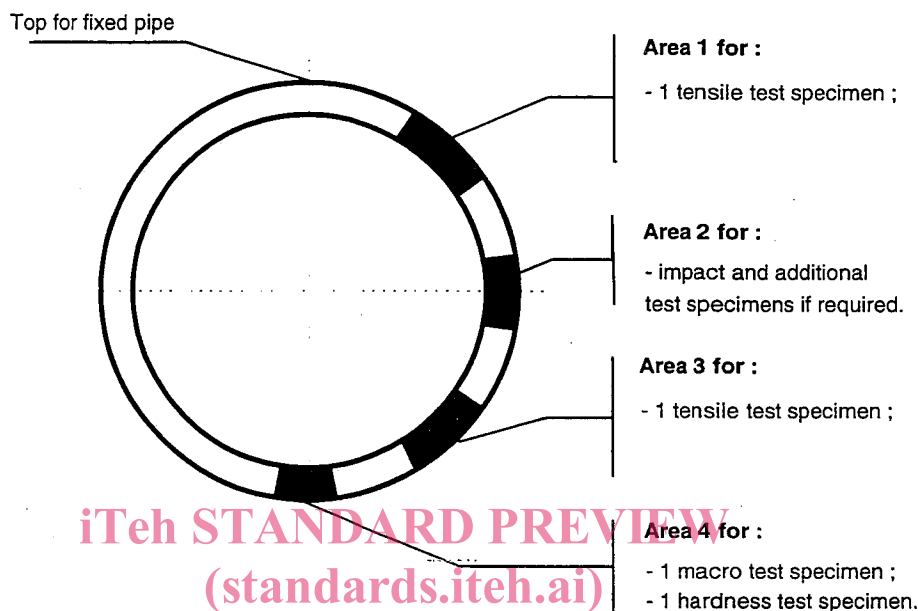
Location of test specimens for a butt weld in pipe - Upwards welding
